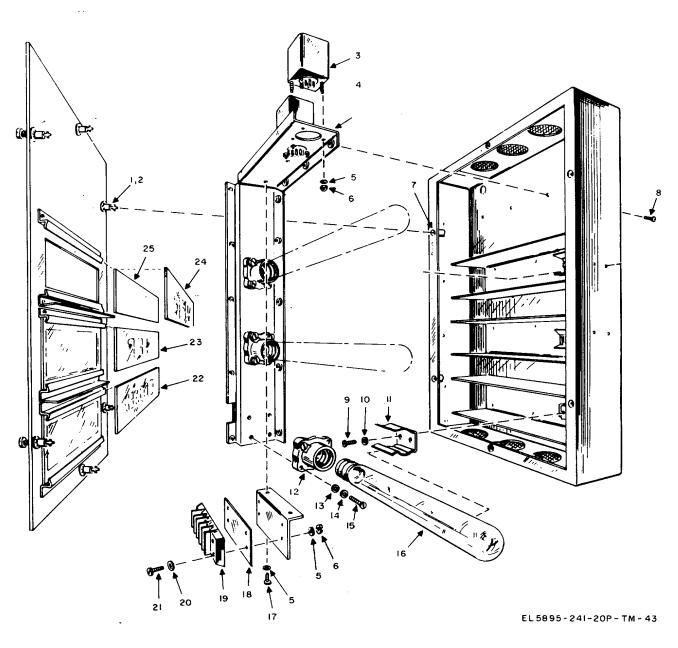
Indicator, Field Status ID-877FSW-8, exploded view.
